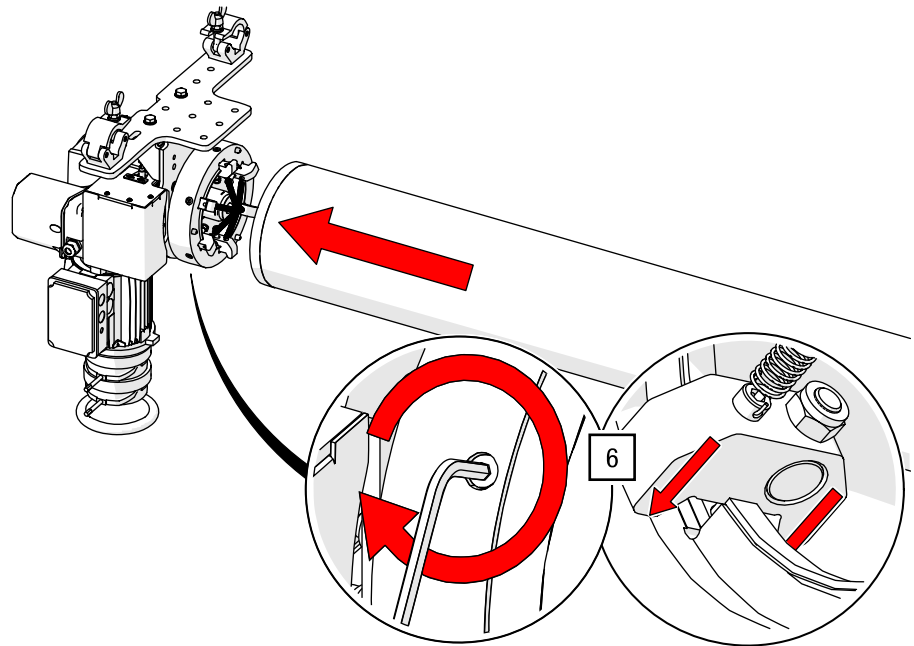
TUBE roller screen – joining the CFRP tubes to the drive-end assembly
